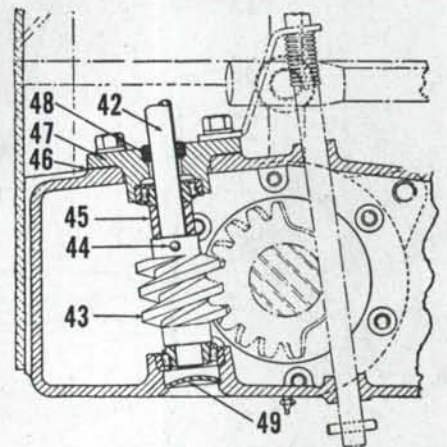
Models RC, WC, WD & WD45 single wheel, dual wheel, and adjustable axle type steering gear assembly.
